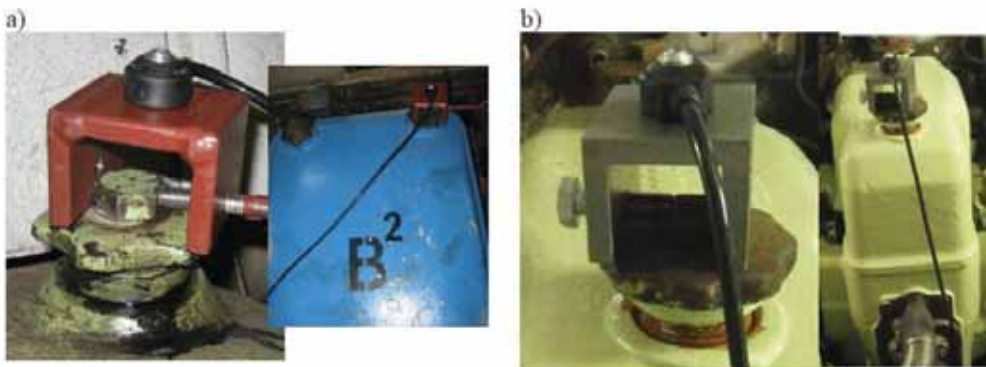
Installing accelerometer of an indicator PREMET® C with mounting brackets on the covers of engine valves: a) a 12ZAV40 SULZER S, b) type 8ATL SULZER 25/30
